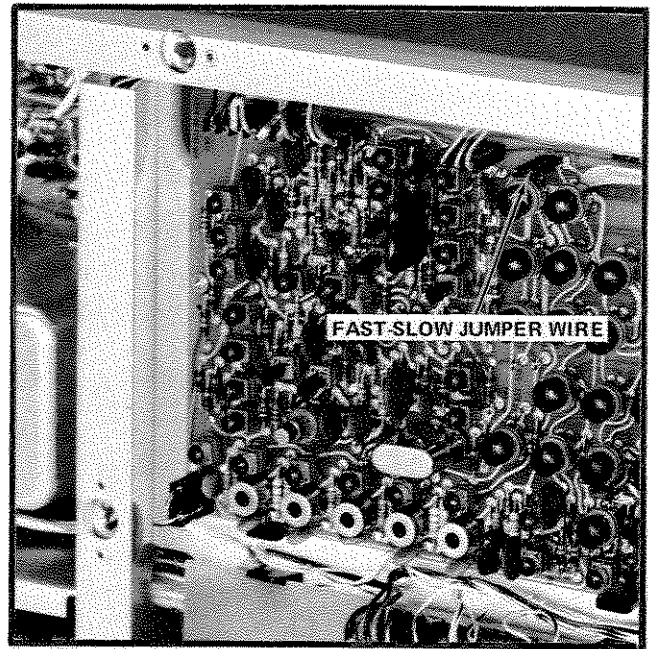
Line Timing board showing location of FAST-SLOW line sync lock jumper.
